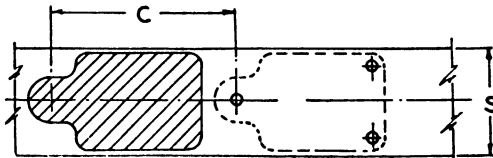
A scrap-strip design for piercing and blanking the piece shown by using only 65 per cent of the strip area.
